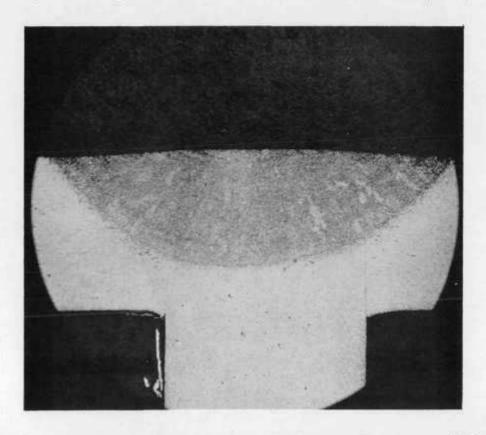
Section of Good T. I. G. Weld after Corrosion (100X)
